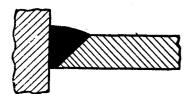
SINGLE-BEVEL BUTT WELD
